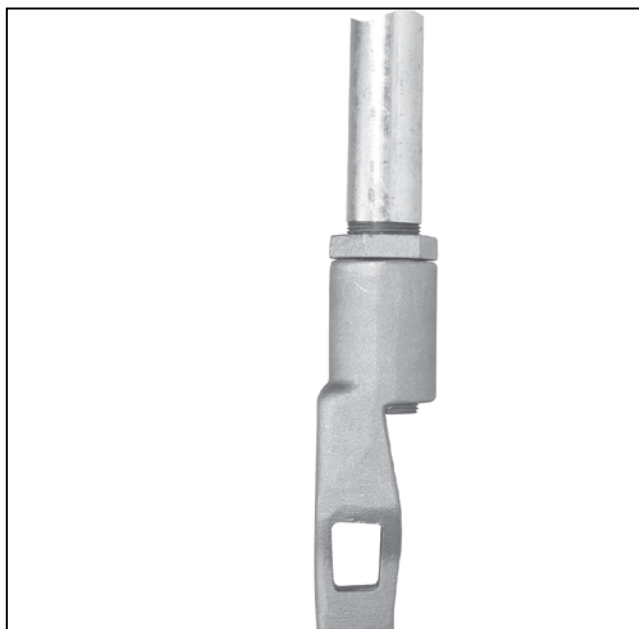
Installing lowest operating pipe section into operating handle assembly.
